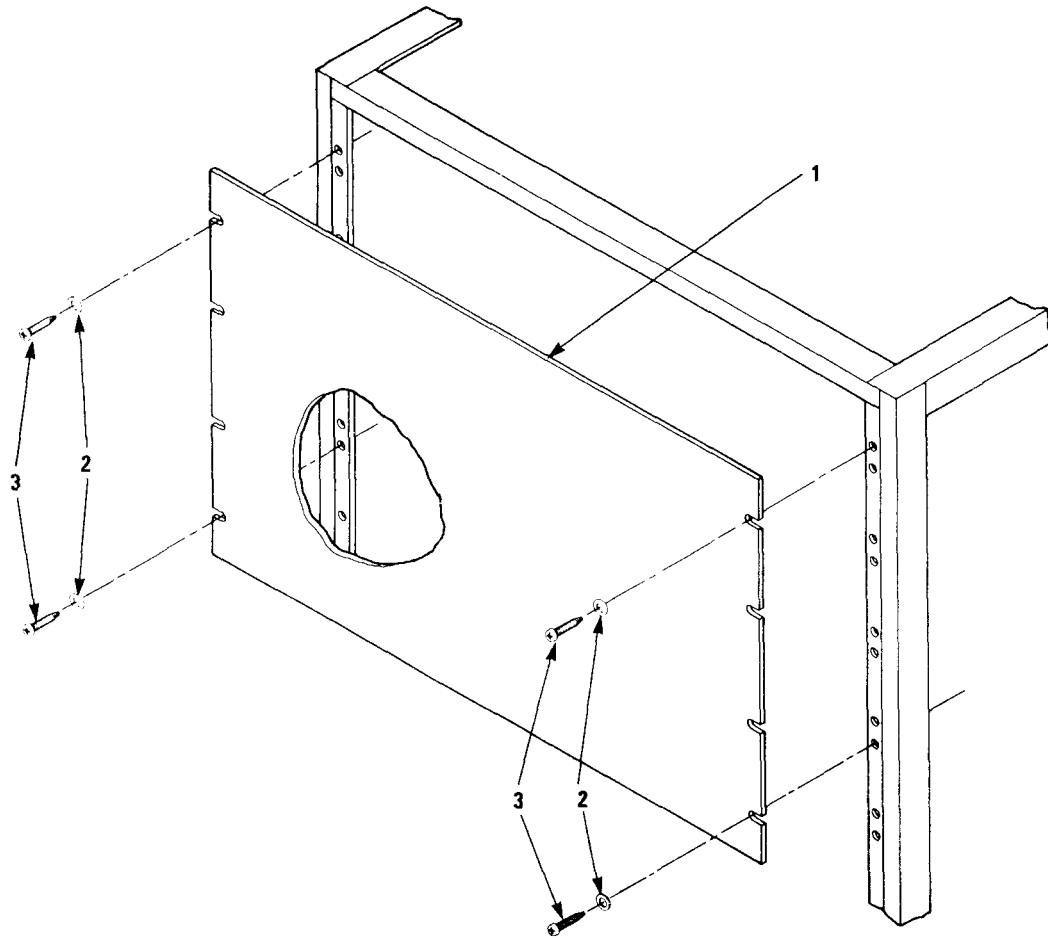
Blank Panel 10-1/2 in. X 19 in. Mounting
